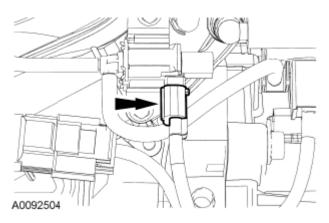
Identifying Knock Sensor Electrical Connector And Pin-Type Retainer Courtesy of FORD MOTOR CO.
